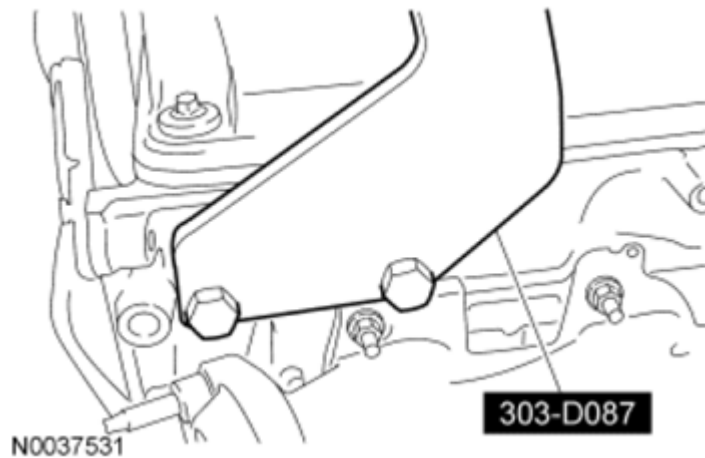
Locating Torque Converter Nut Access Plug
